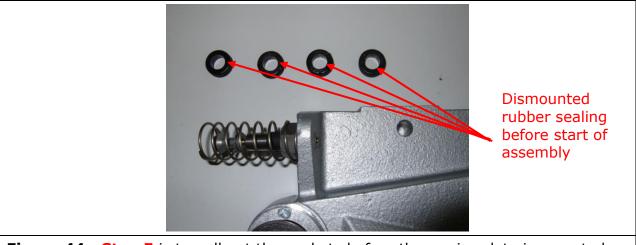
Step 5 is to pull out the gaskets before the carrier plate is mounted
